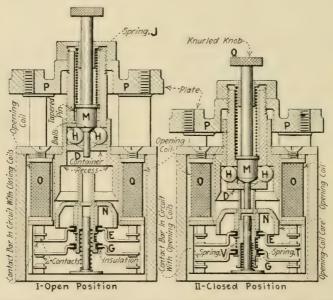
Illustrating locking mechanism and the method of connecting and disconnecting the opening and closing-coil circuit of *Hart Type F* remote-controlled switch.
